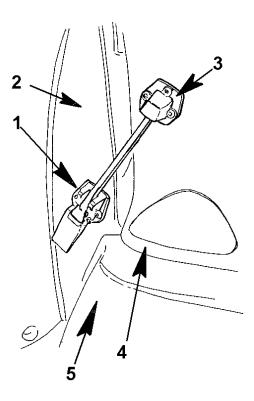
Hood Latch Assembly (Passenger Side Shown)
